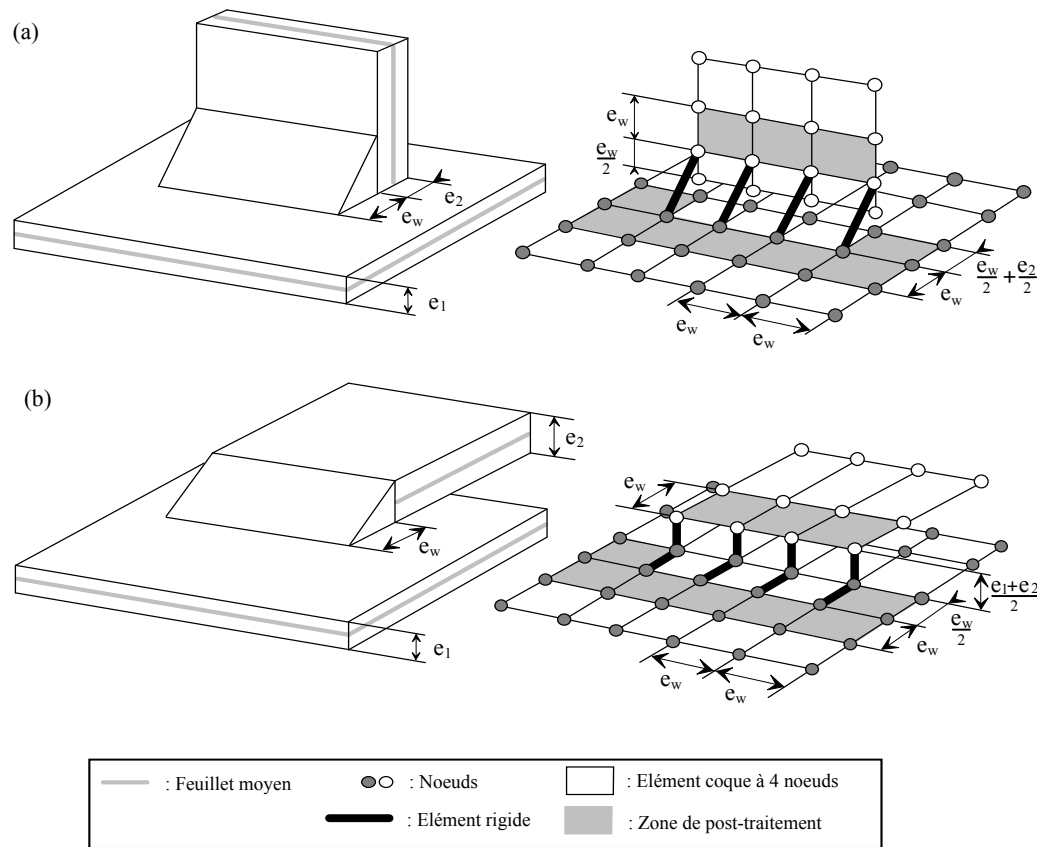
Meshing rules for arc-welded joints. The geometry on the left hand side is associated to the thin shell modeling on the right hand side : (a) for fillet weld; (b) for overlap welded joint.
